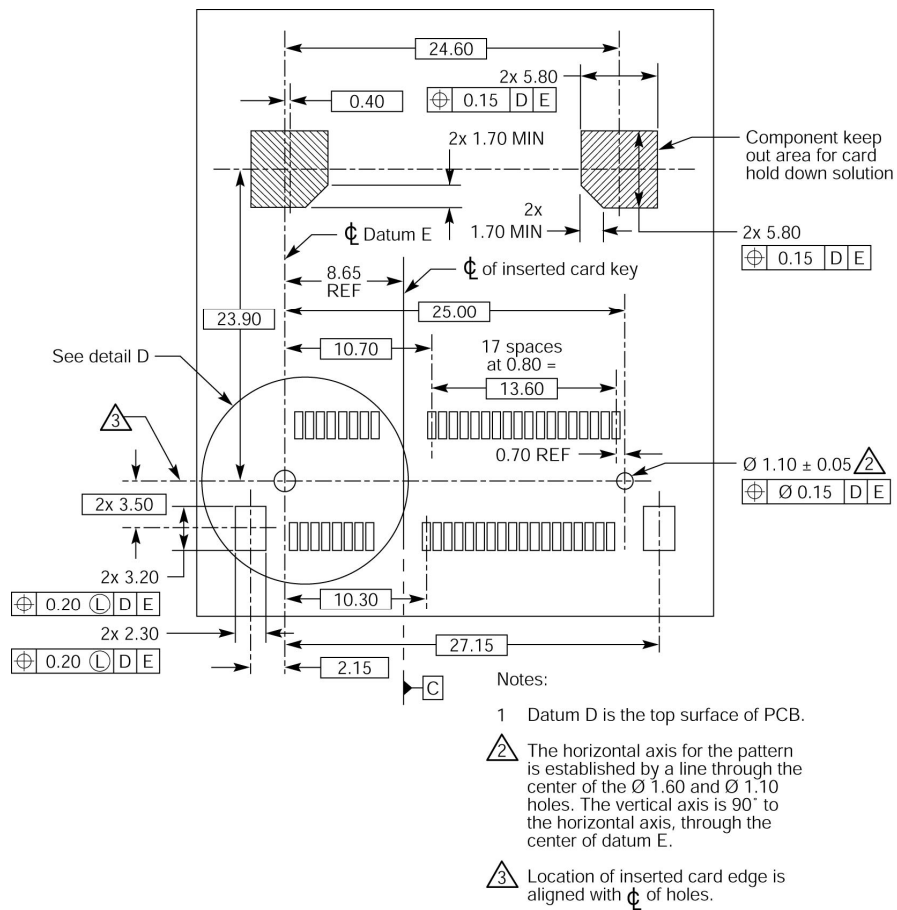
Recommended System Board Layout for Half-Mini-only Socket
